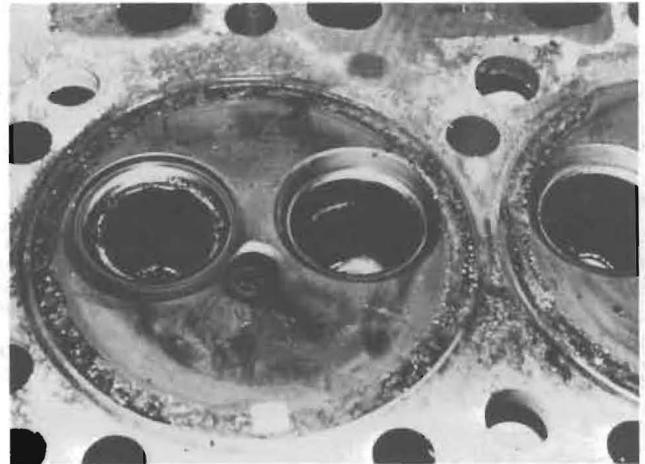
Carbon buildup on the intake port after 250 hours of testing with a 50/50 sunflower oil/diesel fuel mixture.
